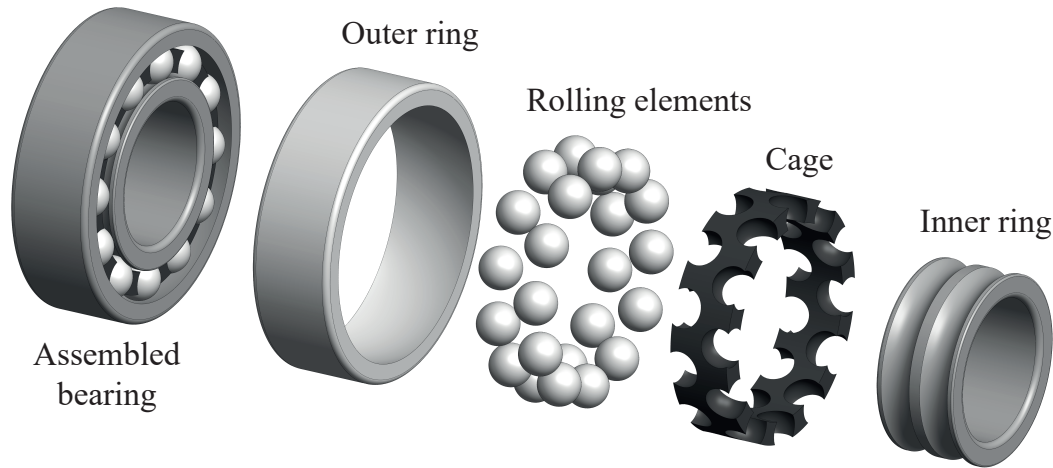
Exploded view of a double-row self-aligning ball bearing.
